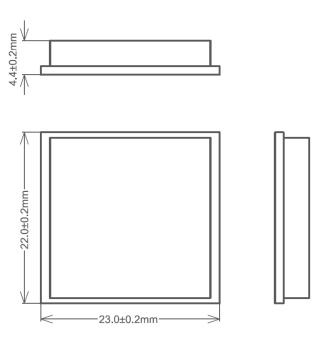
Dimension of swarm bee LE V3 module, top view and side view
